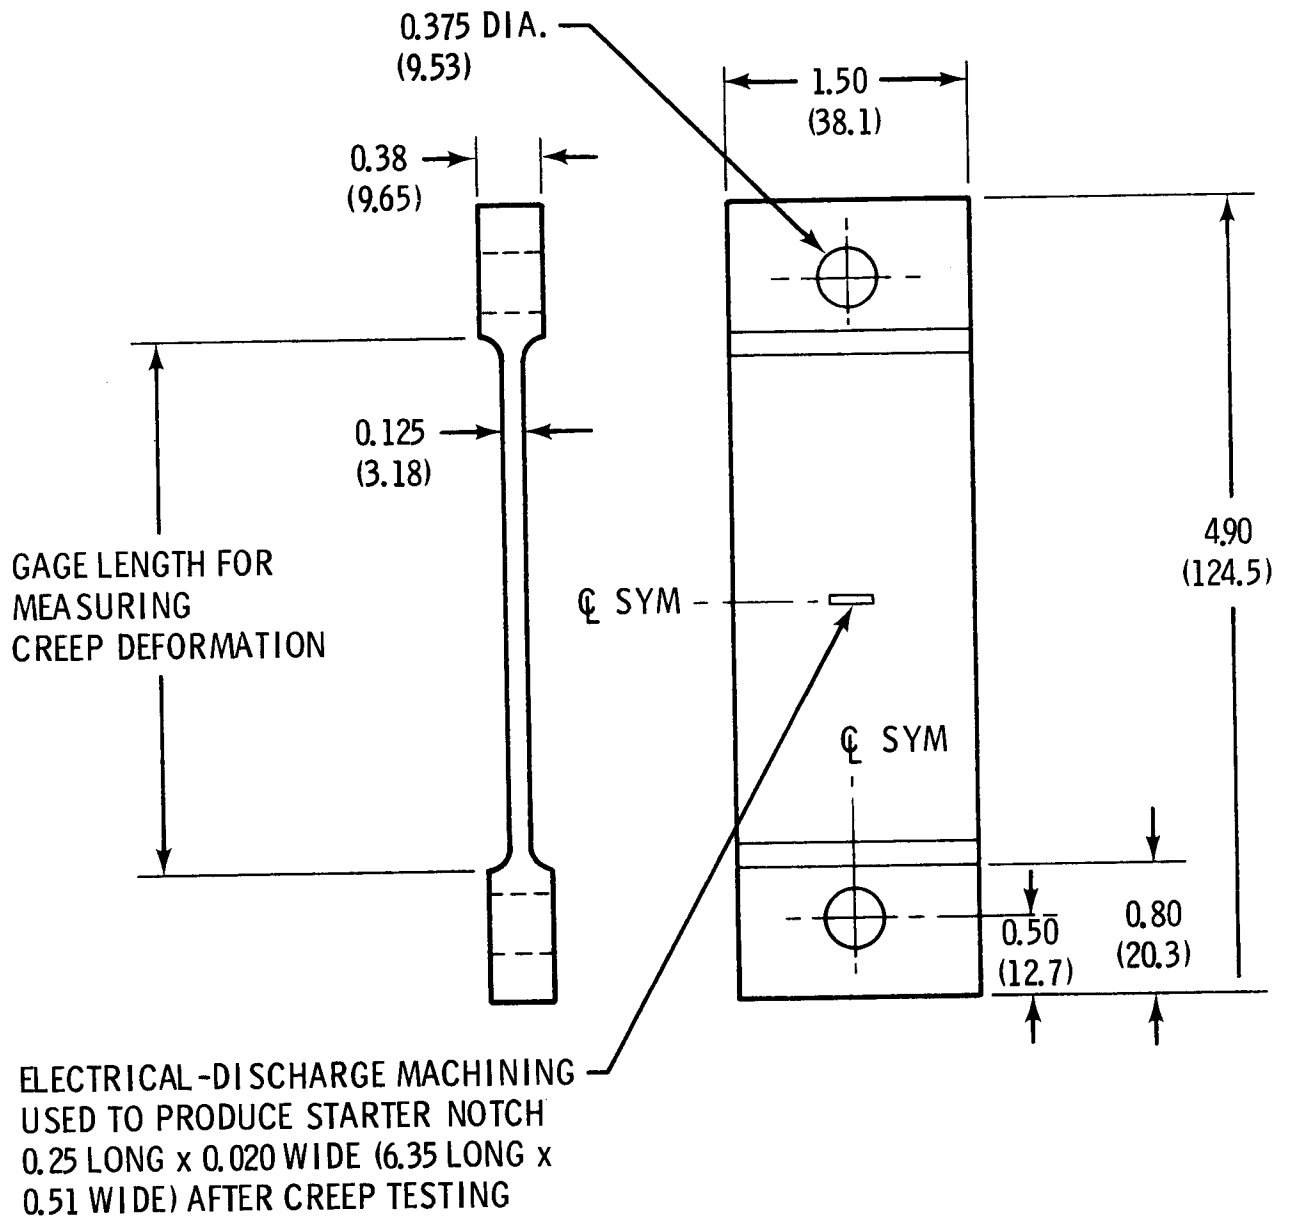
Specimen employed for creep-fatigue tests. Dimensions are in inches (millimeters).
